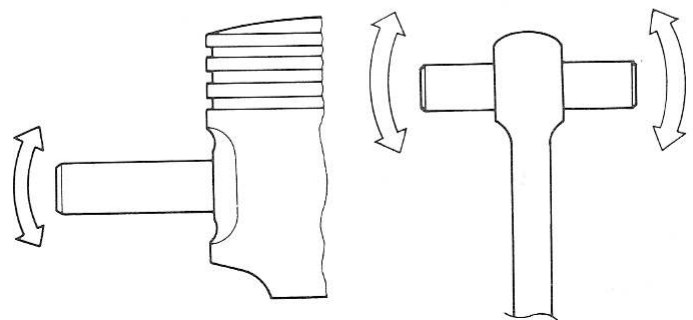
B.21 The piston pin should be inserted into the piston and connecting rod and checked for play (Sec 11)
